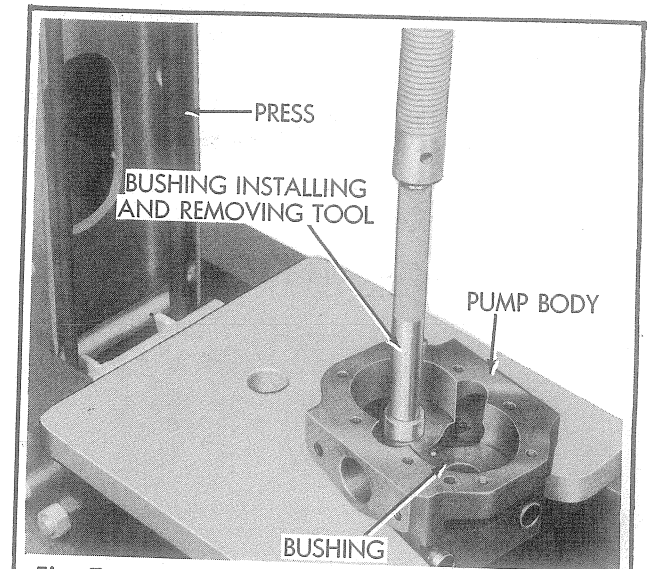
Installing Lubricating Oil Pressure Pump Body Bushings (Tractors Prior to Serial No. 4001 Shown — Tractors Serial No. 4001 and Above Similar)
